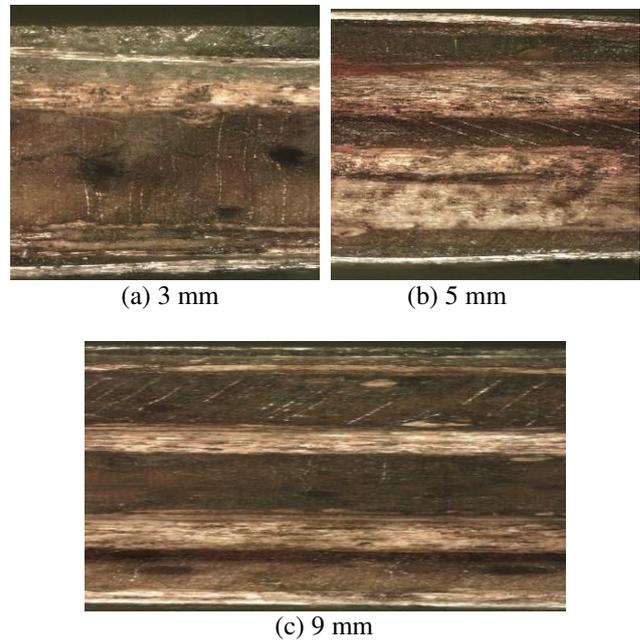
Capture image of plywood sandwich laminate composites with 2500 mm/min laser cut machine cutting speed parameters.
